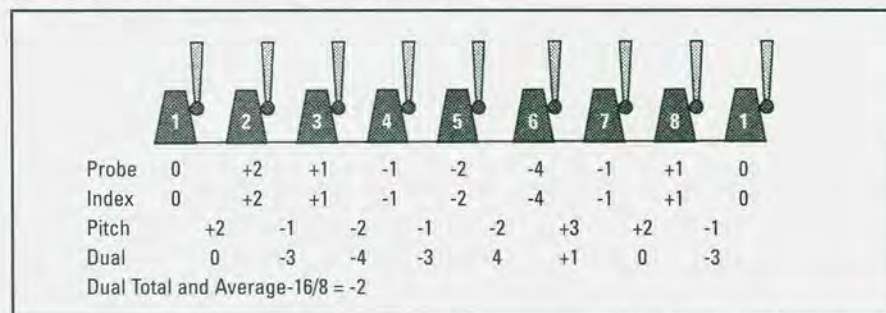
Comparison of single and dual probe test measurements. ©AGMA/ANSI 2000-A88.
